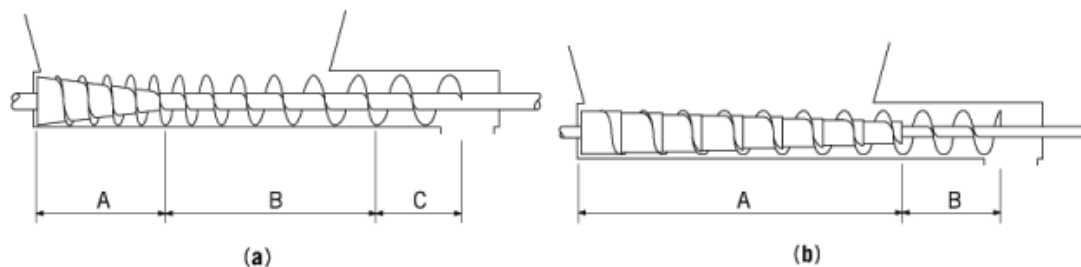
Mass flow screw feeder designs. (a) Combined tapered shaft and variable pitch screw feeder where A represents a conical shaft and constant pitch (feed section); B, constant shaft and increasing pitch (feed section); and C, constant shaft and constant pitch (conveying section). (b) Stepped shaft screw feeder where A represents a stepped diameter shaft and constant pitch (feed section) and B, constant shaft and constant pitch (conveying section).
